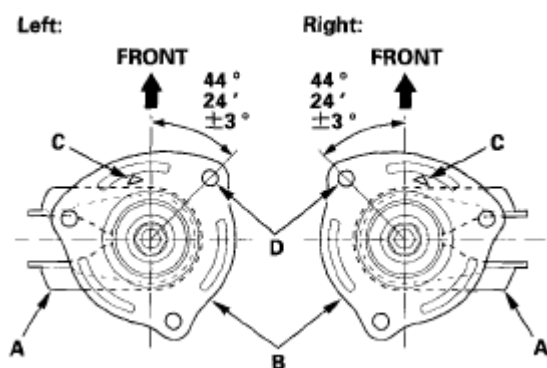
Aligning Angle Of Strut Bolt On Damper Bracket
